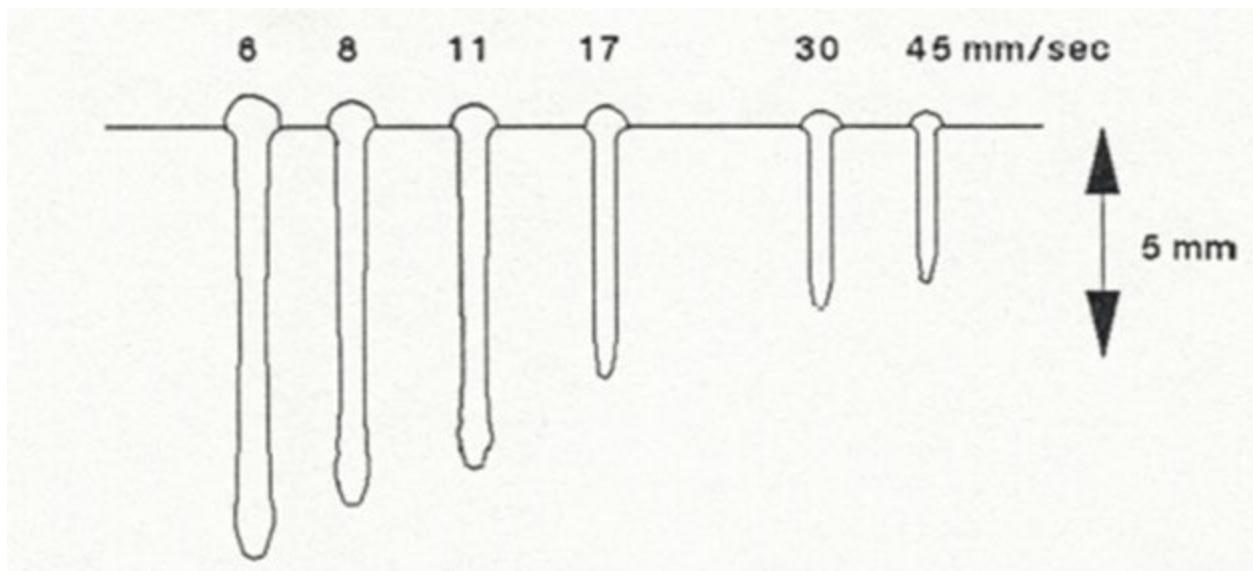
Data showing how weld depth of penetration depends on weld travel speed for EB welds in Type 21-6-9 stainless steel.
